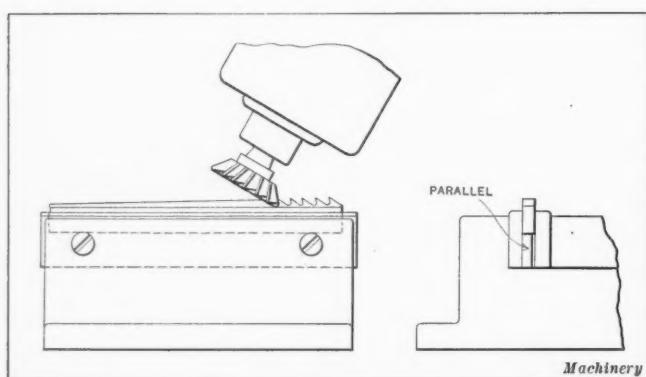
Milling a Broach with Vertical Attachment and Angular Cutter
